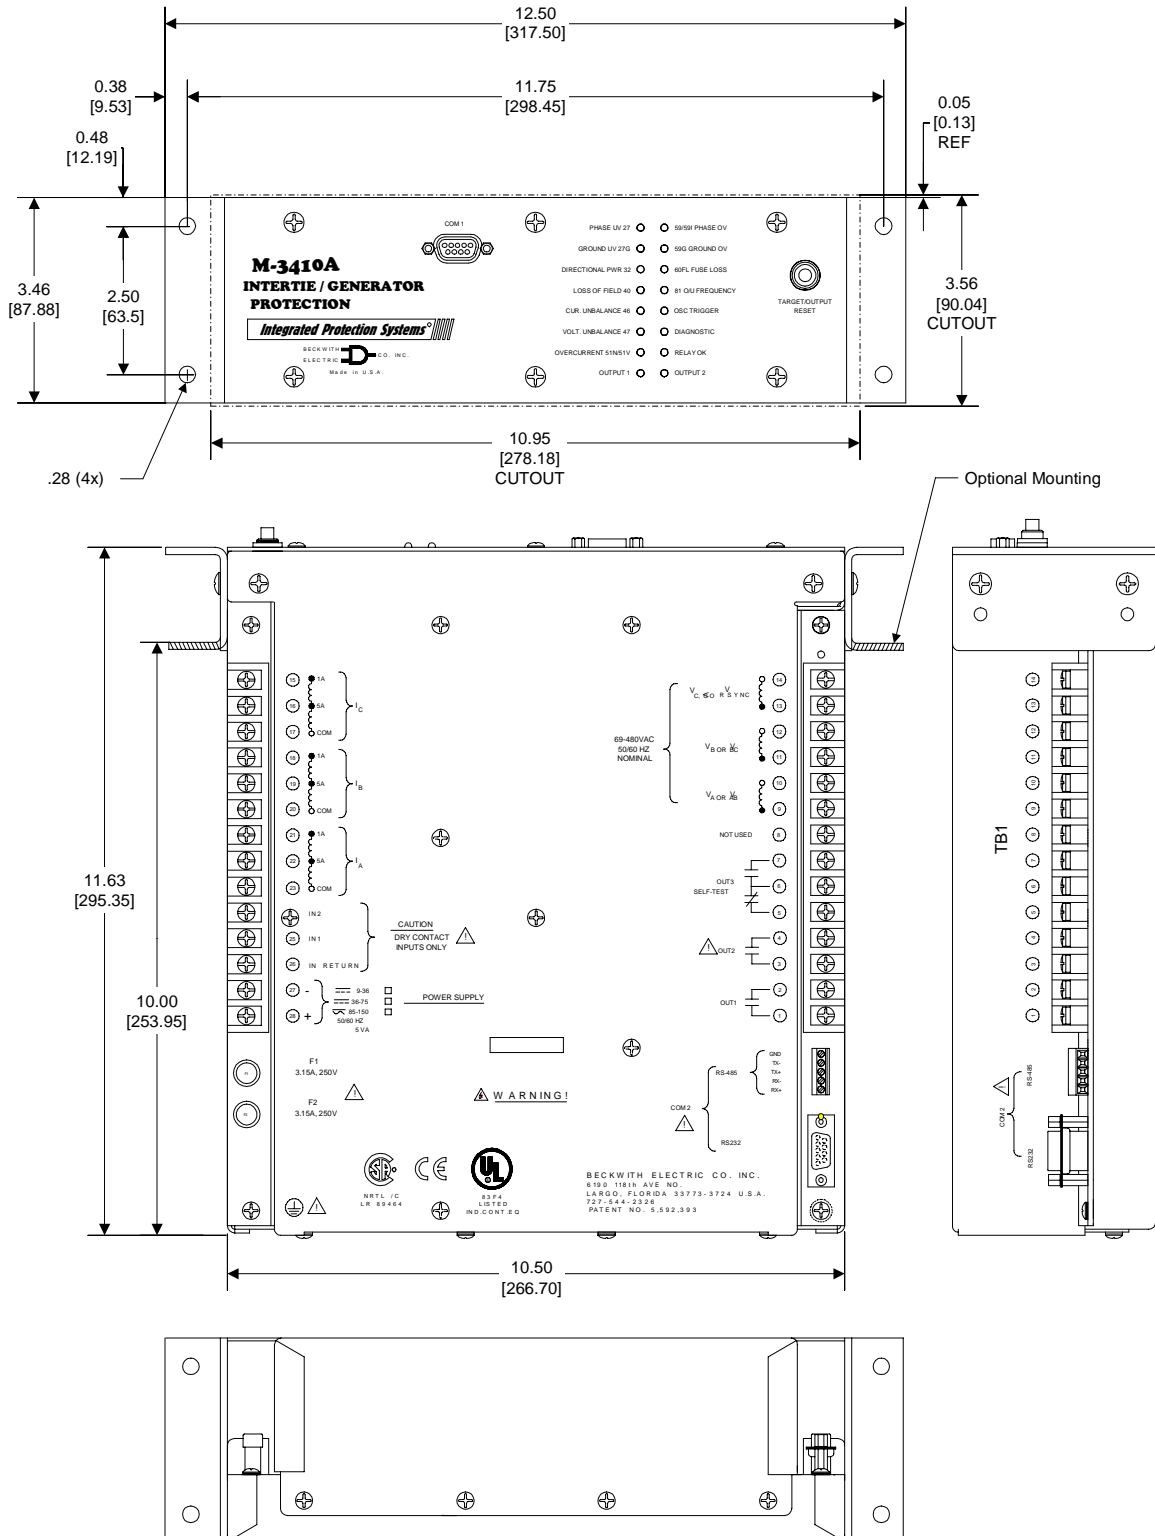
Optional Horizontal/Vertical Panel Mounting Dimensions
